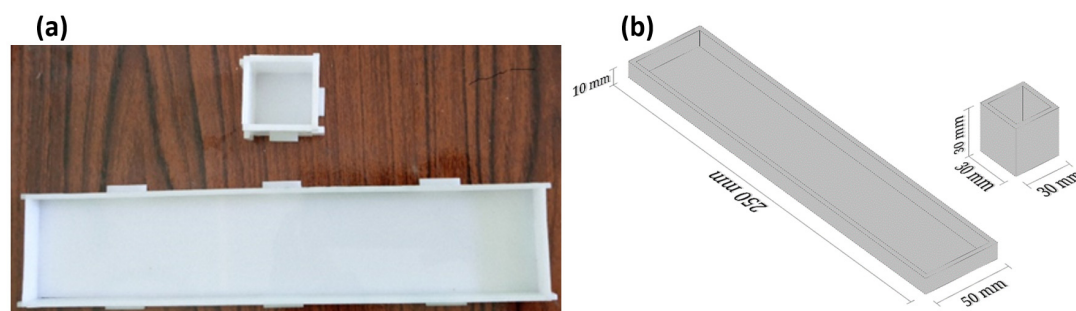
Mold of casting composite (a) plexiglass molds, (b) 3-D drawing with dimension.
